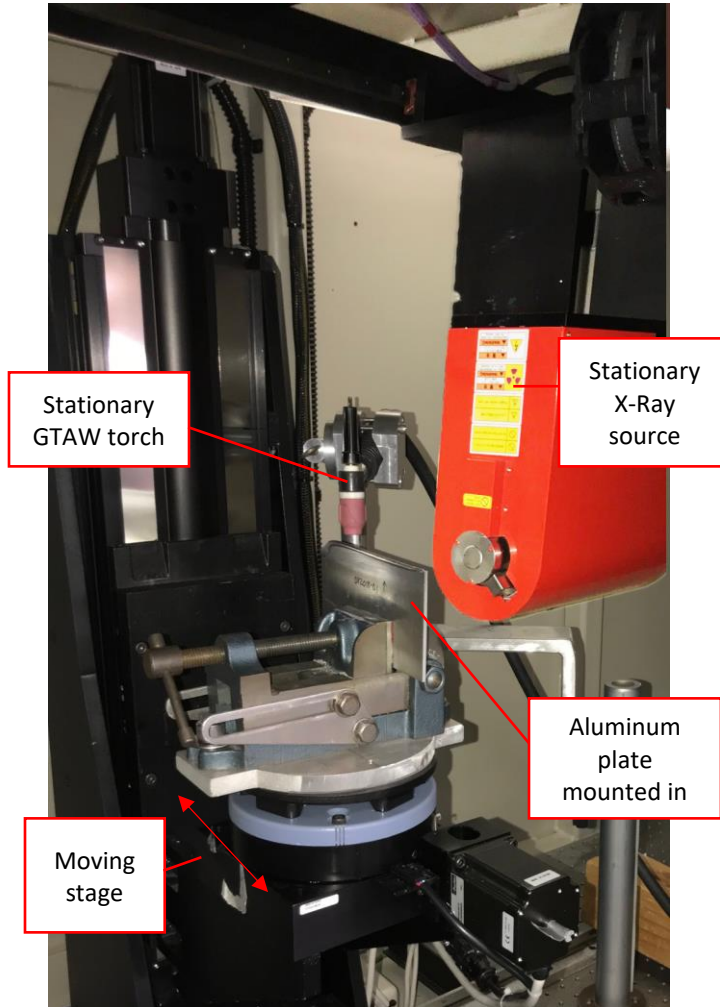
Photograph of experimental set-up showing moving aluminum plate specimen, GTA welding torch and stationary aligned x-ray source (red).
